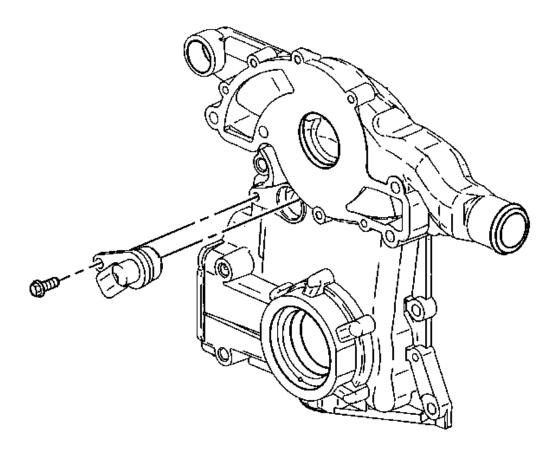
Camshaft Position Sensor Courtesy of GENERAL MOTORS CORP.
